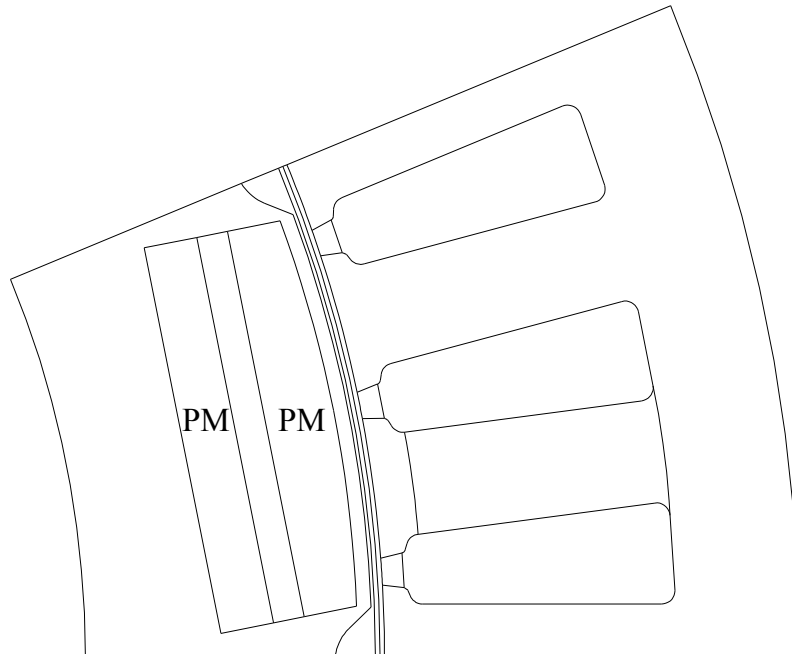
Pole arrangement of the embedded magnet machine.
